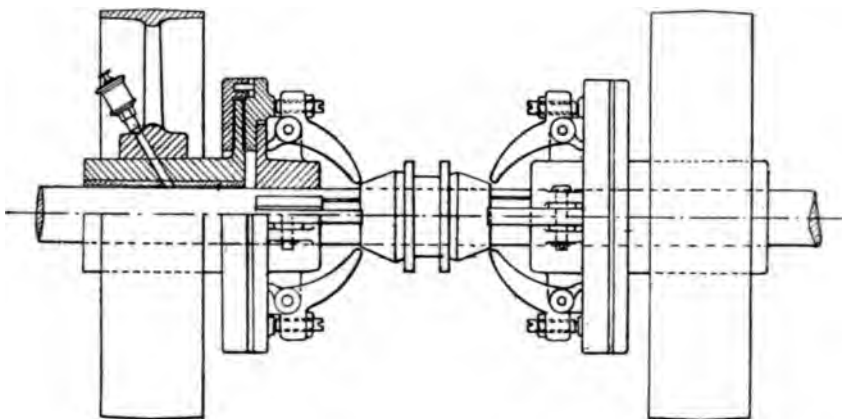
Disc Clutch adapted to Reversing Countershaft.
